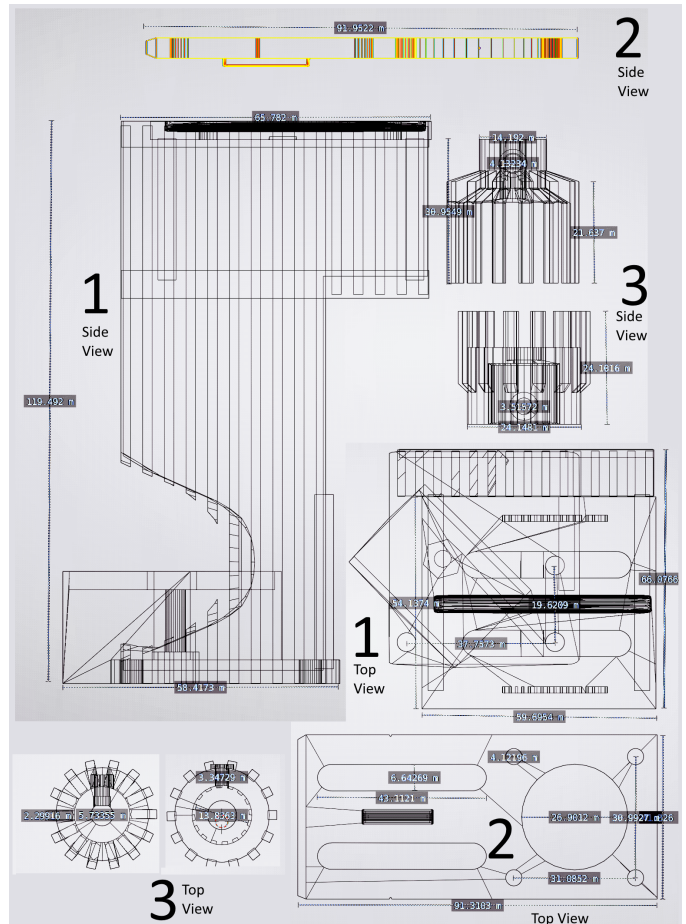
This diagram shows the dimensions of the printed parts that couple the motor to the micro-probe arm shaft and mount the motor to the micro-probe arm itself. Part one is the main body of the mount, it secures to the probe arm and holds a mirror. On top of part one sits part two. This part is where the NEMA 17 stepper motor bolts to. Part two has a central oblong protrusion running lengthwise that fits in a groove of part one. The two long holes give lots of flexibility for mounting and fine adjustments to the alignment of the shaft coupler. Part three is actually two individual parts that mesh together with fingers. They secure to the stepper motor shaft and the vertical adjustment knob of the micro-probe arm. Each part is pictured with multiple angles, each labeled.
